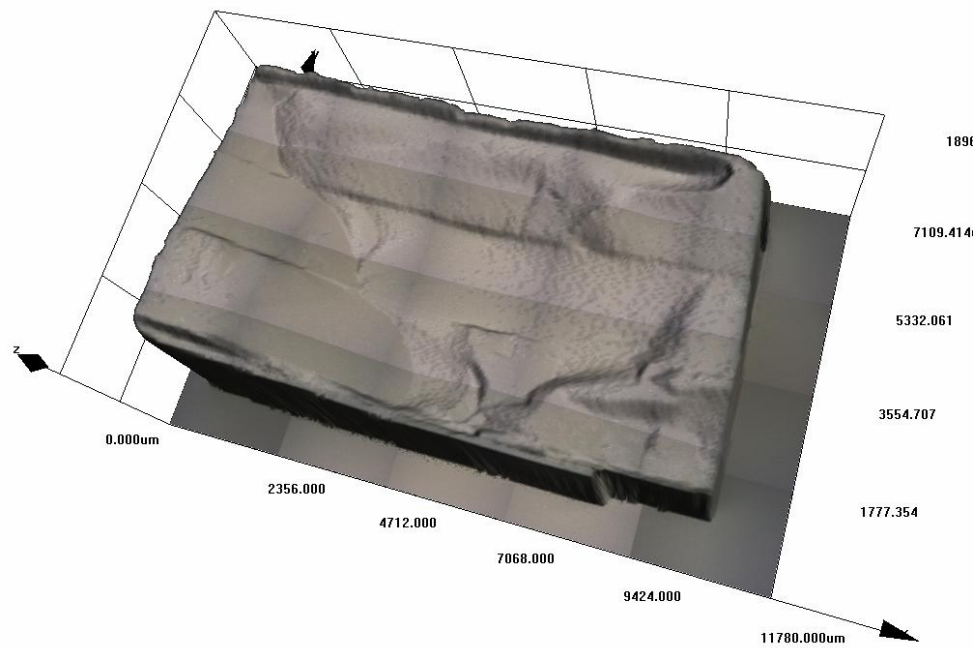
Preview of fracture surface of 9-layered Lam V3A prepared by slip casting.
